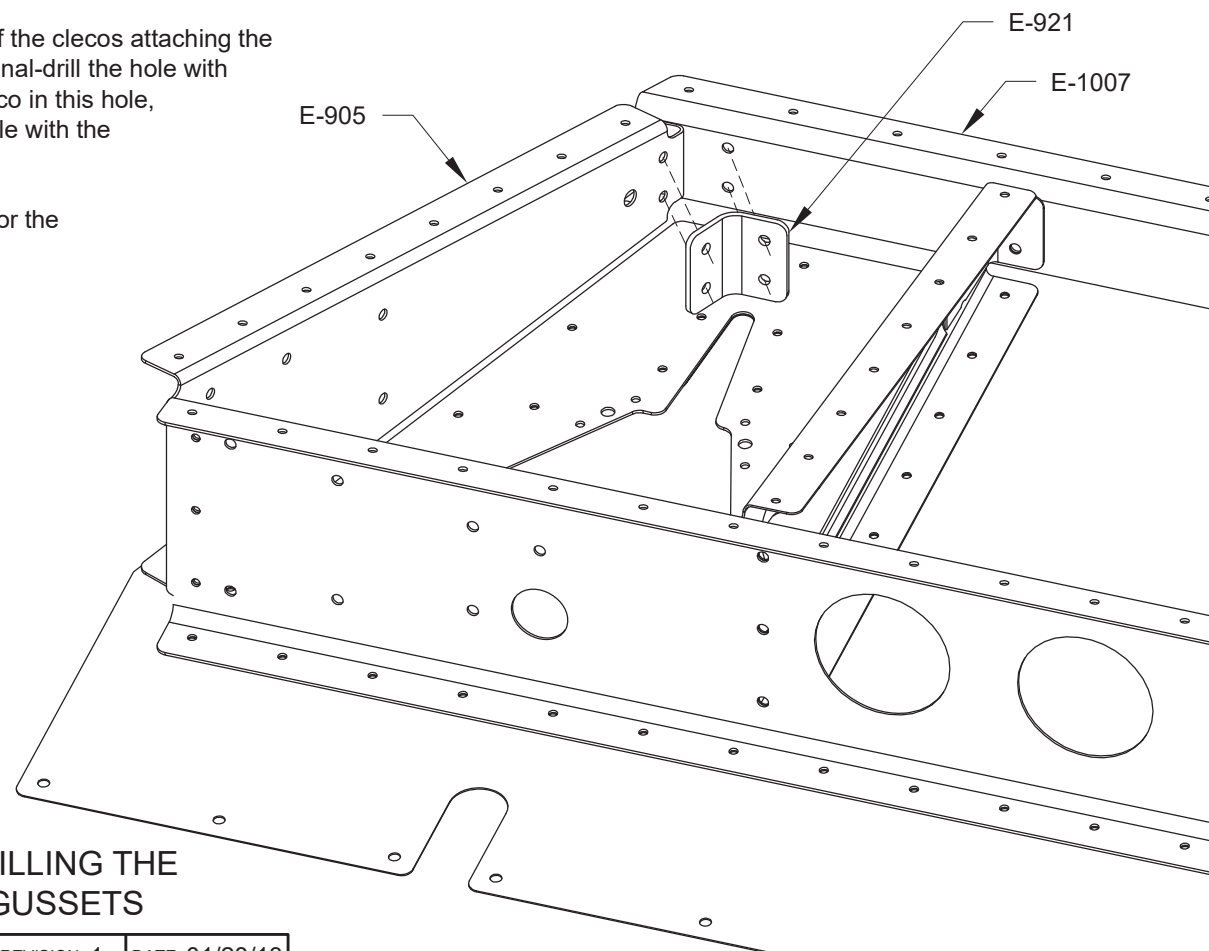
DRILLING THE ELEVATOR GUSSETS
